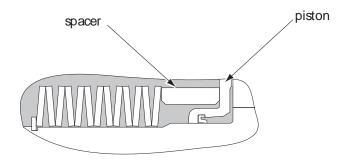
Install piston return springs. First spring with larger diameter of bevel towards wear sleeve. See Figure 106. Alternate seven (7) springs. See note Figure 56.
